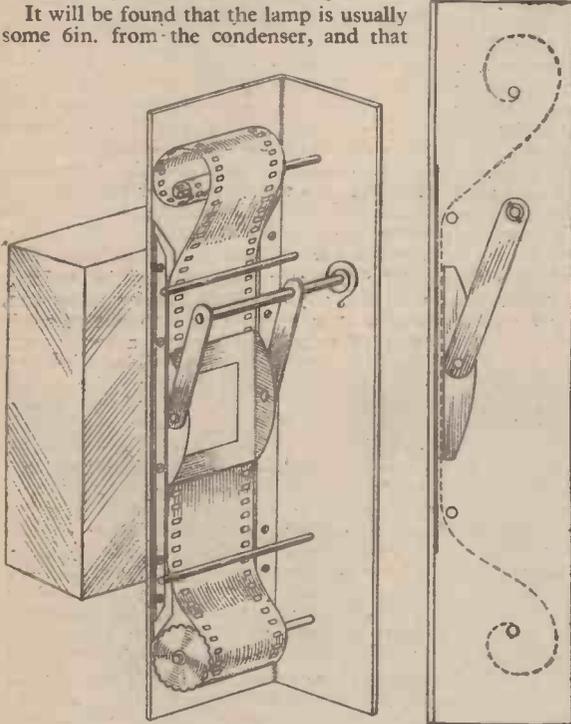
General arrangement and side view of a simple film-strip holder.
